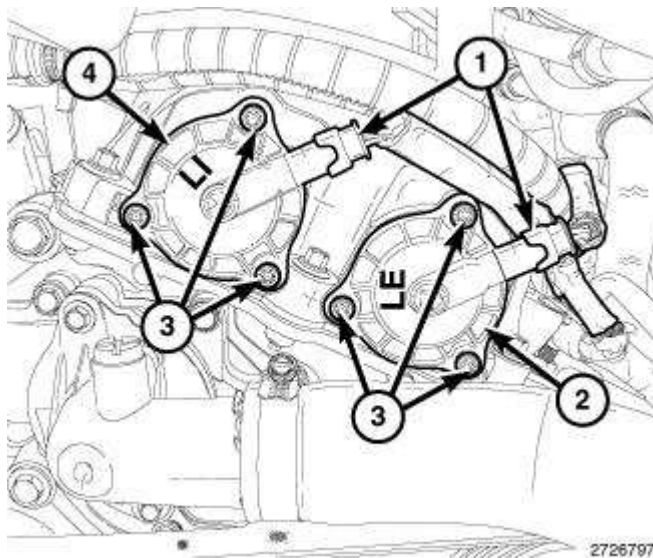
Variable Valve Timing Solenoids, Connectors & Bolts
